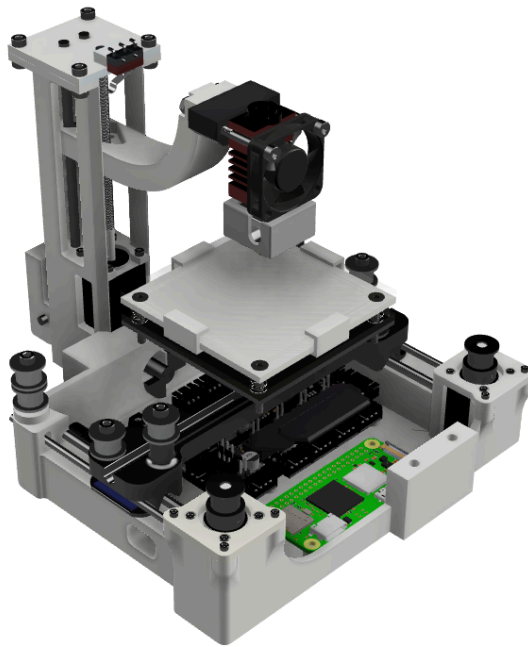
Full CAD Assembly of Linear Rod Design Isometric View
